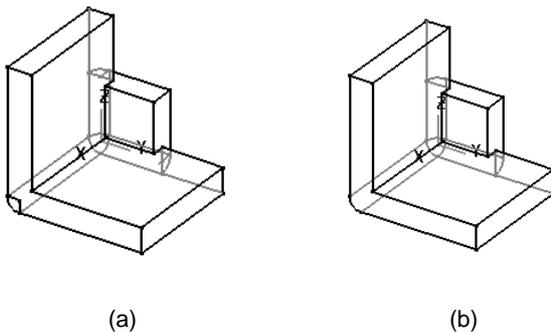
Removing holes on thickness faces: (a) three holes on the thickness faces; (b) after removing holes
